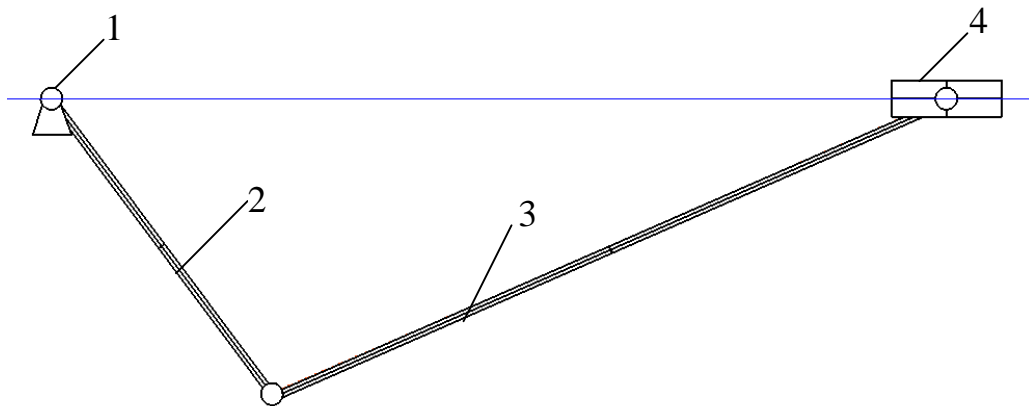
Slider-crank mechanism: 1 – base, 2 – crank, 3 – con-rod, 4 – slider.
